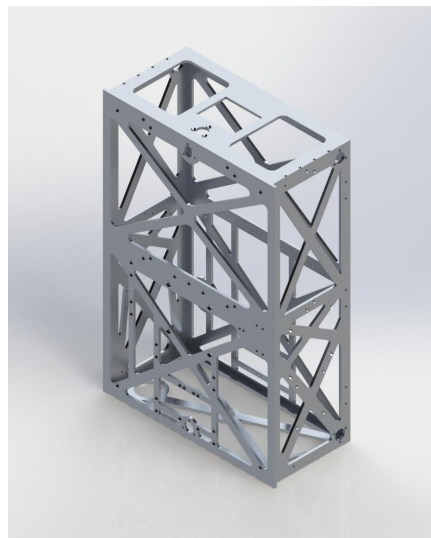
Isometric view of chassis CAD model without components or attachments
